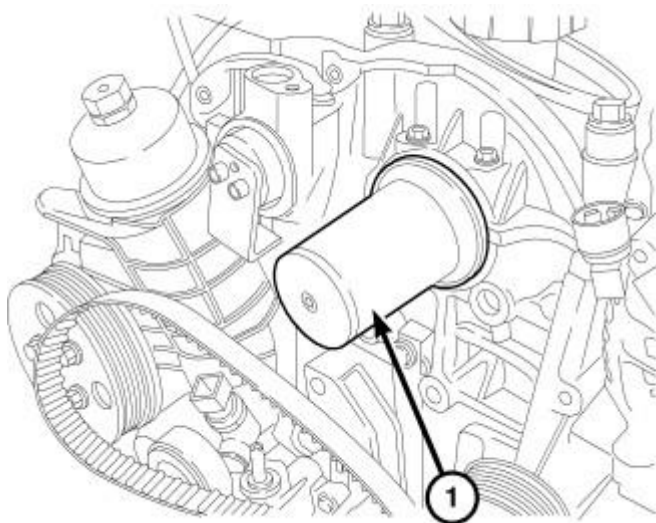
IDENTIFYING SEAL REMOVER HANDLE, SEAL REMOVER & INTAKE CAMSHAFT OIL SEAL
